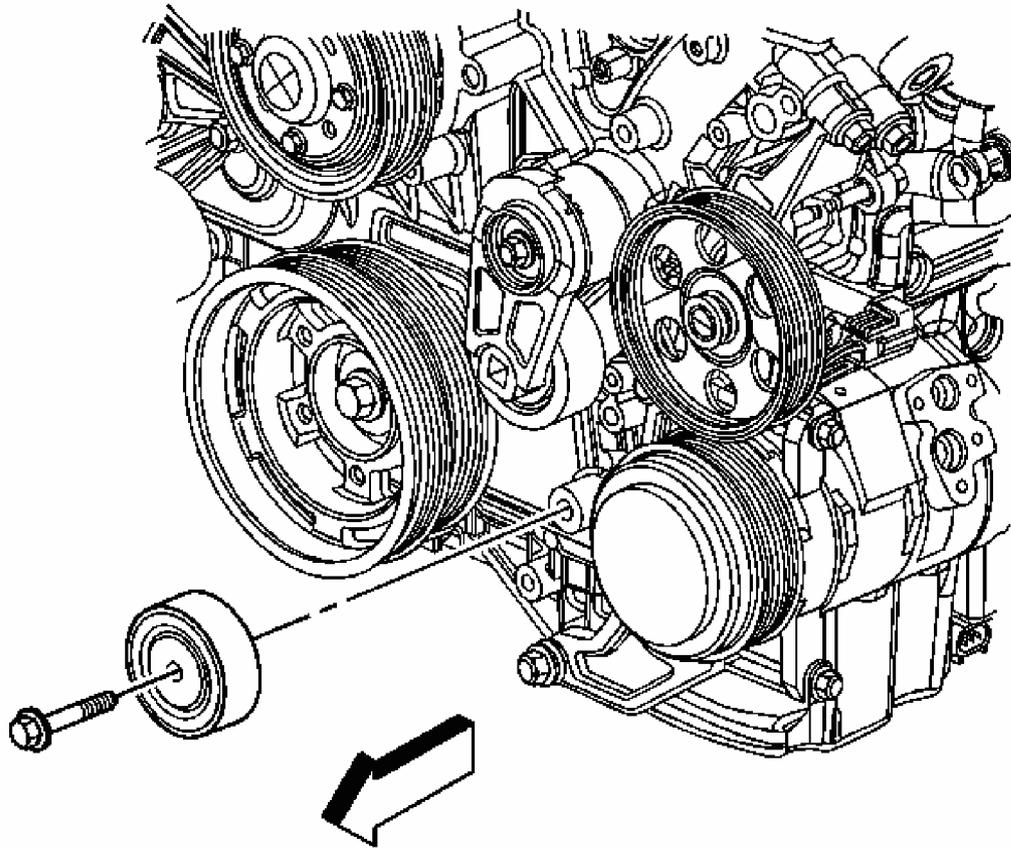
Removing & Installing Drive Belt Idler Pulley Bolt
